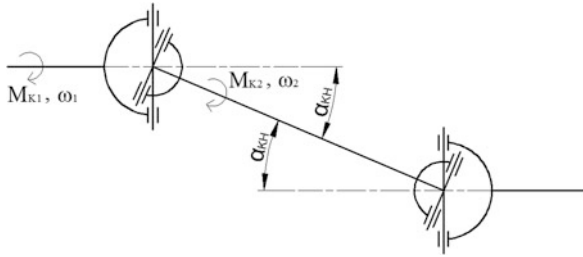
Principle of cardan-joints or telescopic joints shaft
